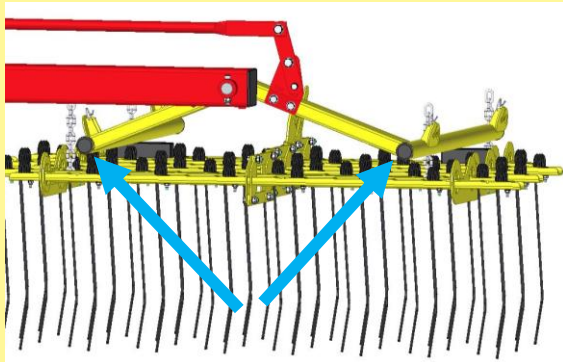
Plastic plugs on the tine section forks 1 that must be removed
